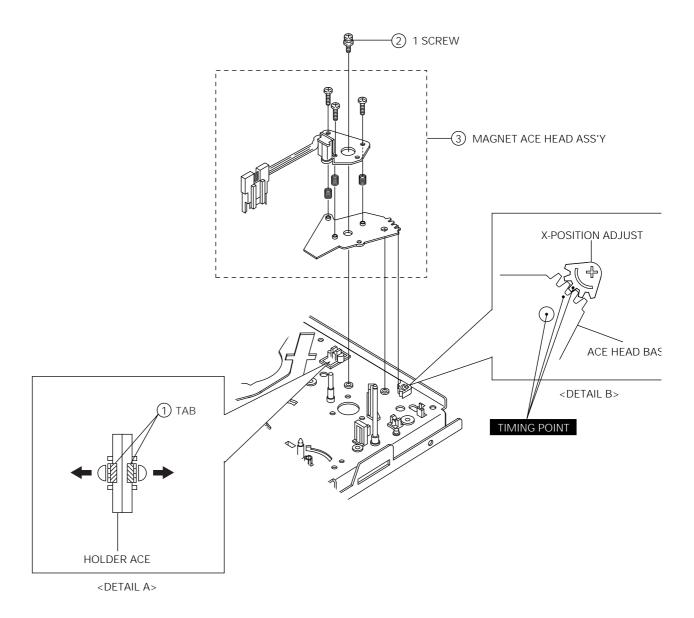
ACE Head Ass'y Removal and Reassembly
